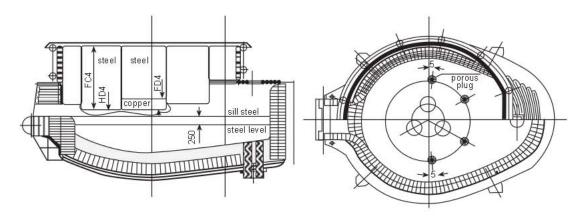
Plan and section views of a modern EBT EAF. (Courtesy of Danieli.)
